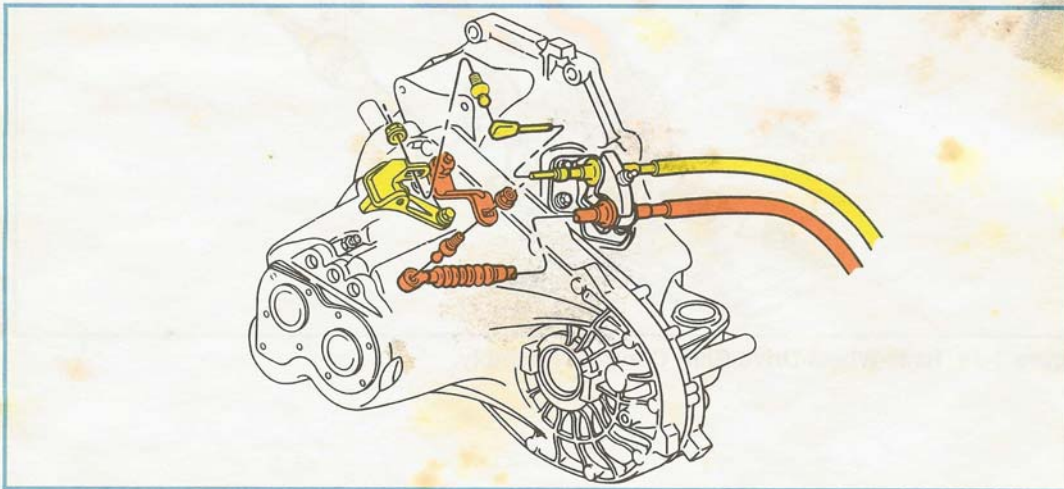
, Front-Wheel-Drive Transaxle Linkage.
